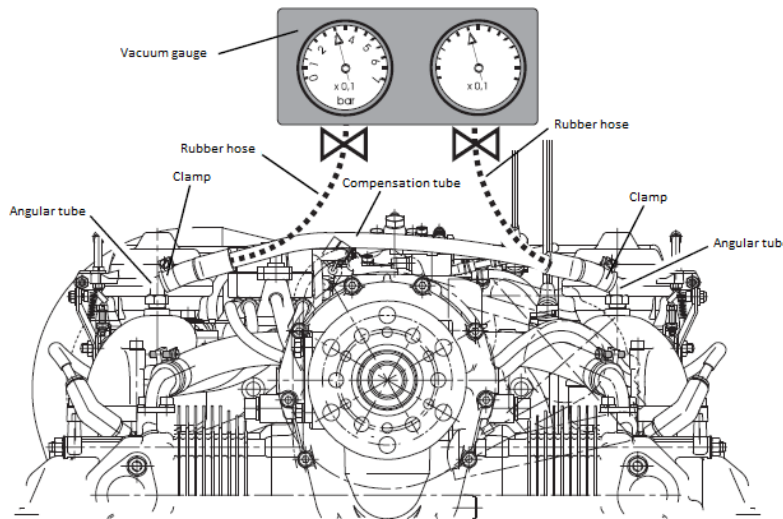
Setup for pneumatic synchronization option 1
